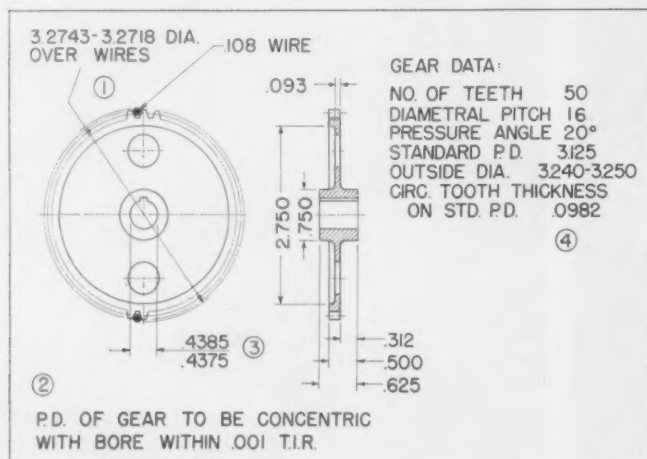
Four errors on this spur gear drawing concern wire measurement, bore tolerance, run-out total indicator reading, and tolerance for the circular tooth thickness.
